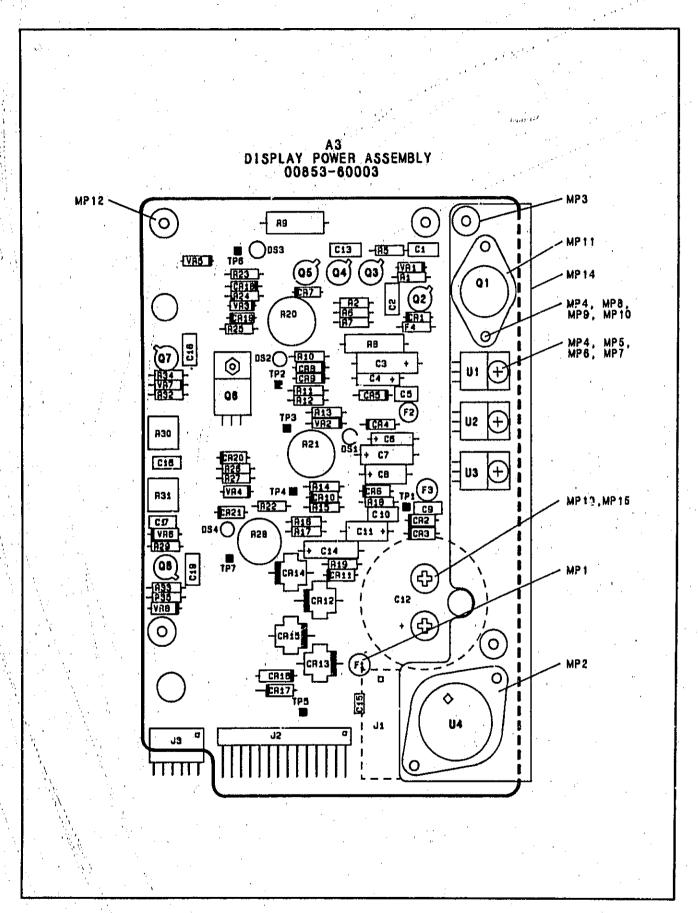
Display Power Supply Assembly A3, Component Locations
